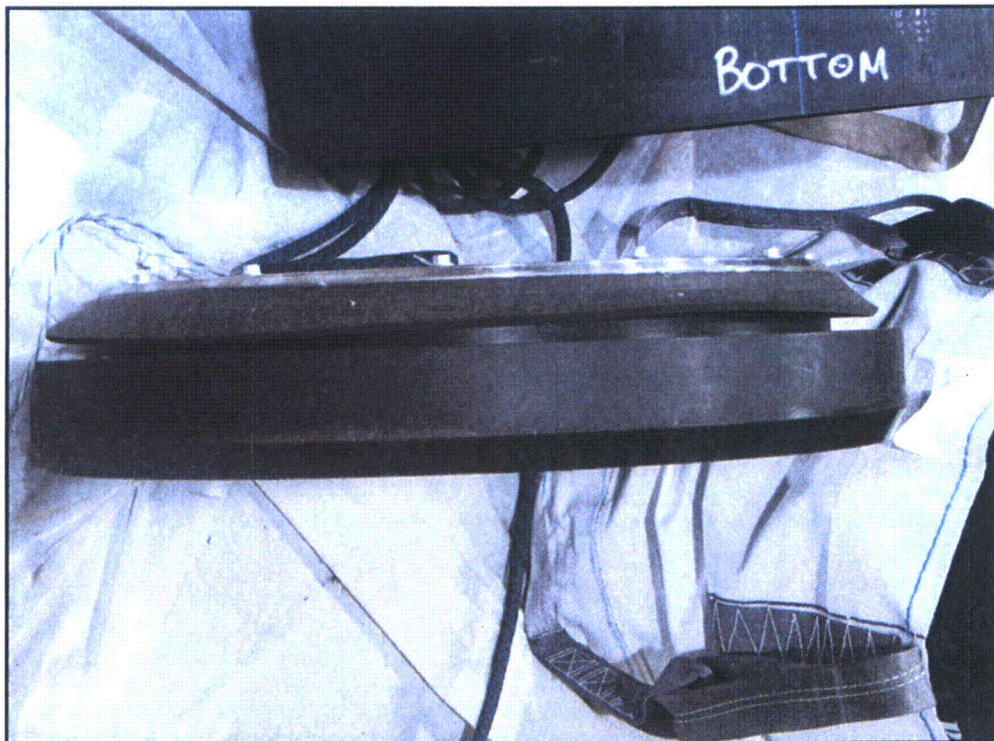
Bottom End Cap Gasket (opposite side, no thru-thickness damage)
